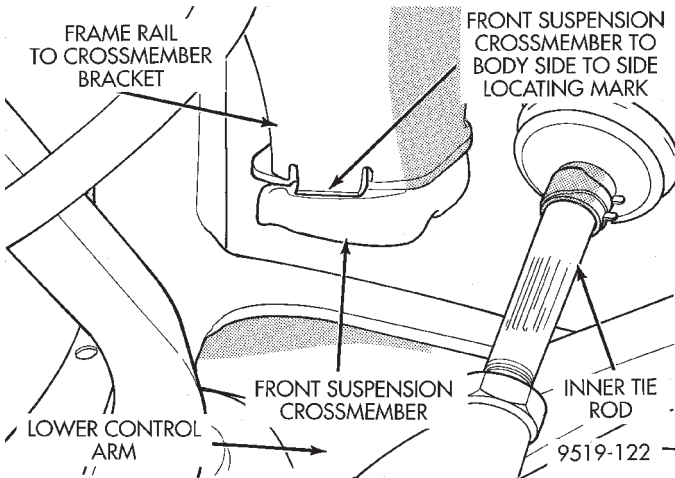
Front Suspension Crossmember Side To Side Locating Mark
